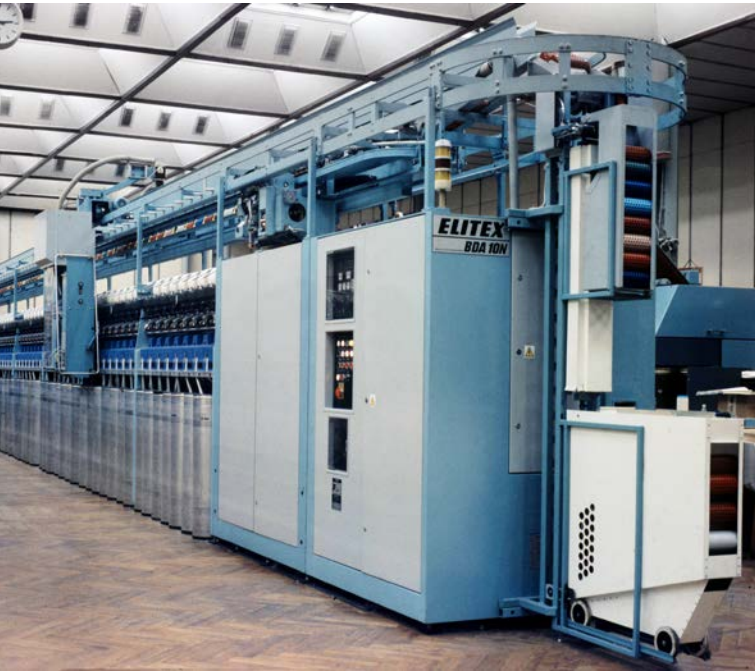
The first automatic rotor spinning machine – BDA-10 – with automatic rotor cleaning and piecing
